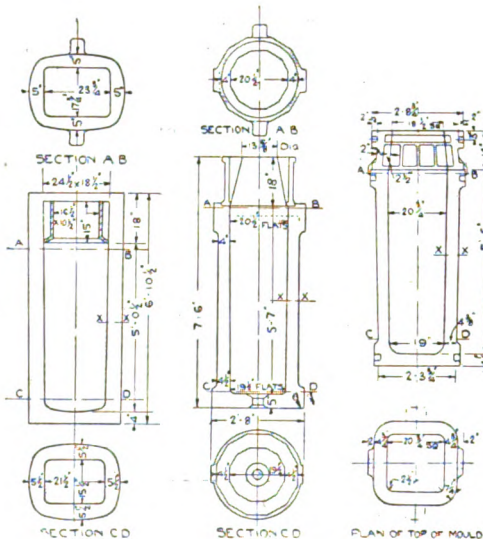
Mould G. FIG. 8.—Mould H. FIG. 9.—Mould I.
